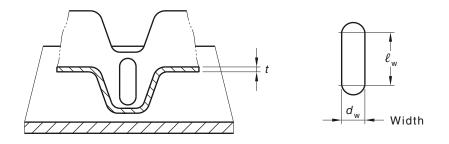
ARC SEAM WELD—SHEET TO SUPPORTING MEMBER IN FLAT POSITION
